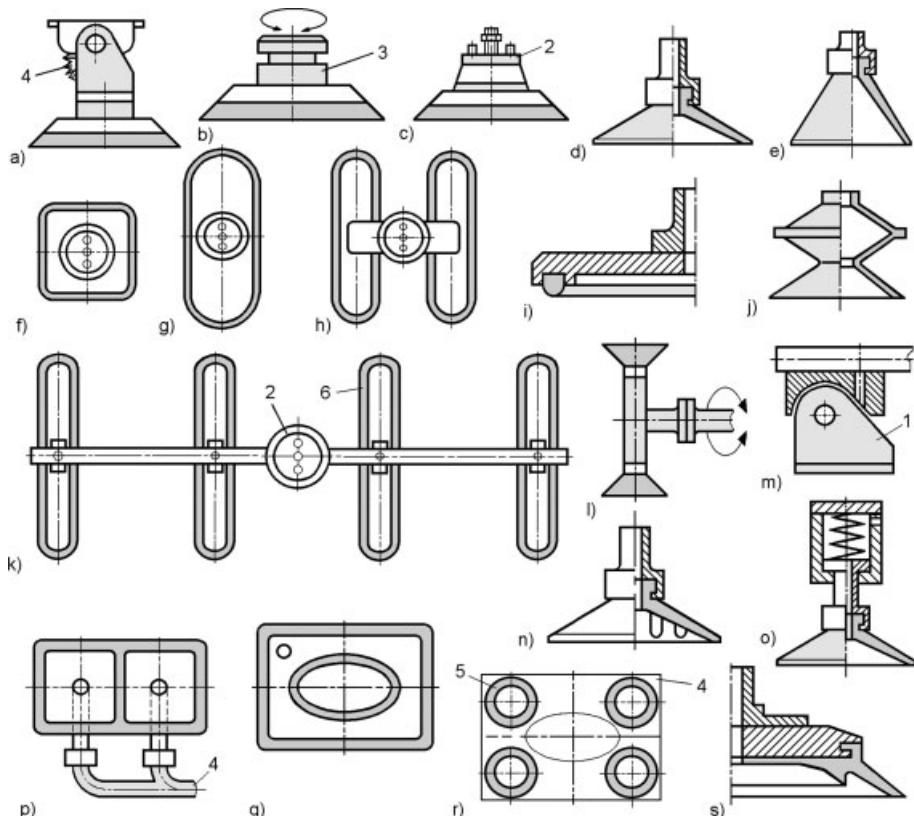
Typical suction head designs: above and cross-sectional views
